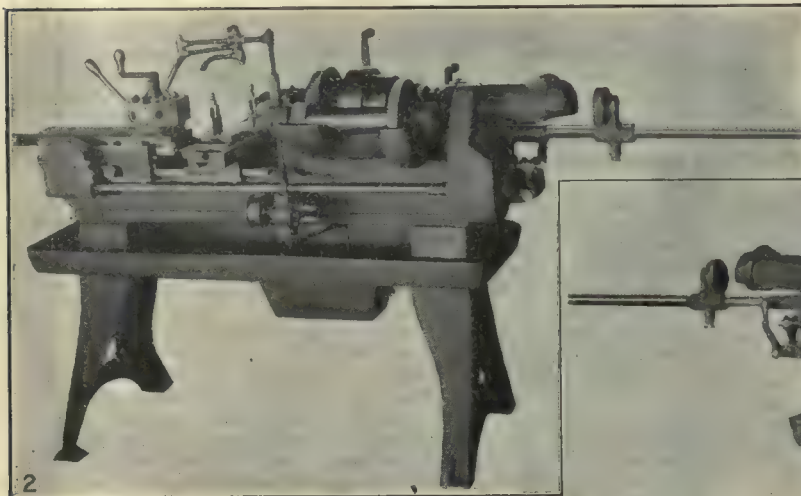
THE MILLHOLLAND NO. 2 FRICTION-HEAD SCREW MACHINE
